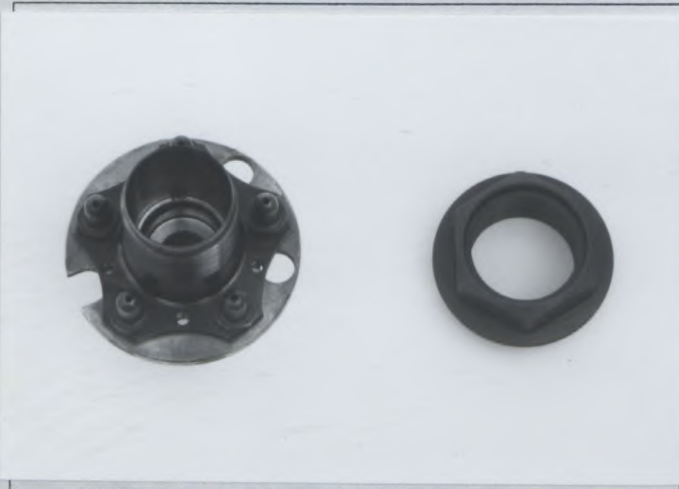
CENTRAL WHEEL BOLTING SYSTEM,
